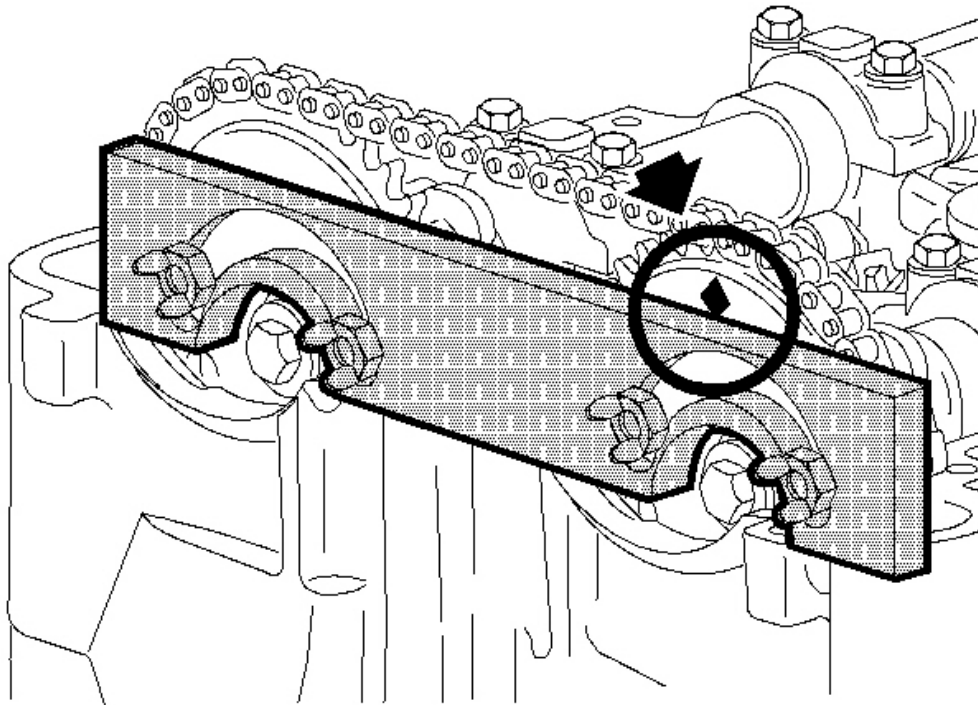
Locating Diamond Shaped Hole On The Intake Camshaft Sprocket At The 12 O'clock Position
